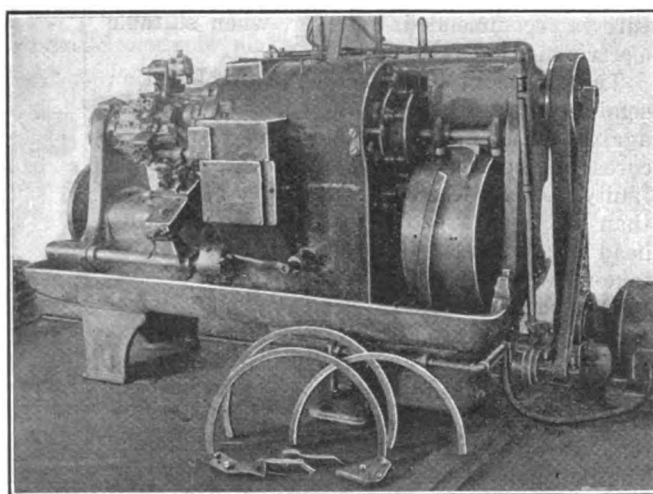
REAR VIEW OF BAIRD CHUCKING MACHINE
